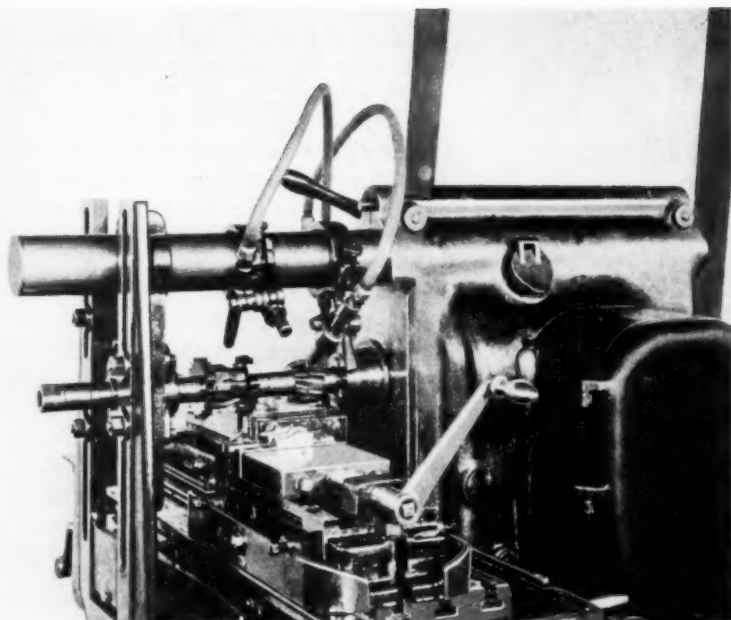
MILLING BY THE RECIPROCATING METHOD
